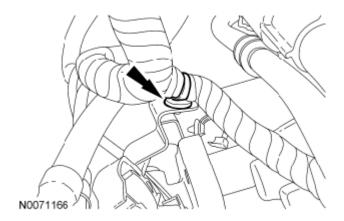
Locating Transaxle Fluid Indicator Tube Bracket Bolt
